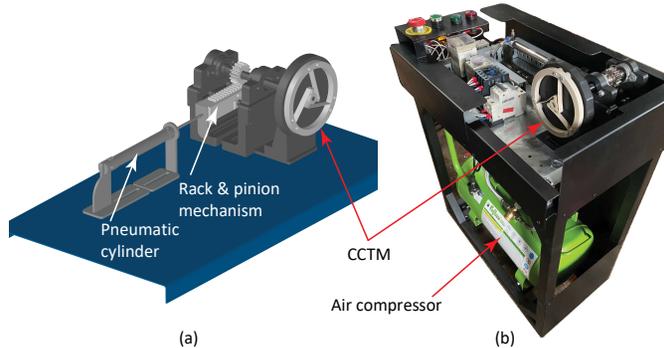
Fatigue testing machine for the proposed CCTM: (a) CAD design; (b) practical testing equipment
